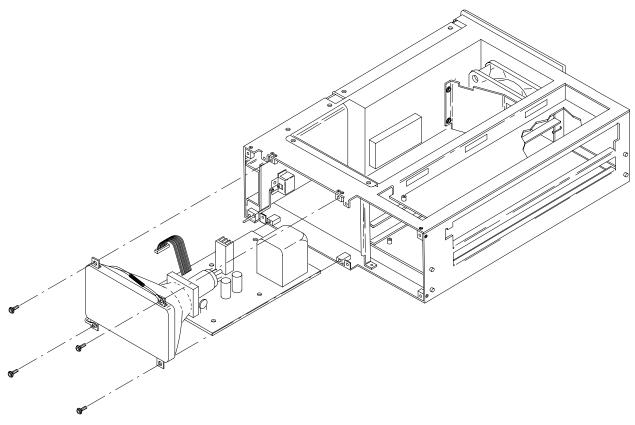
Detaching the CRT and Removing the CRT/Display Assembly
